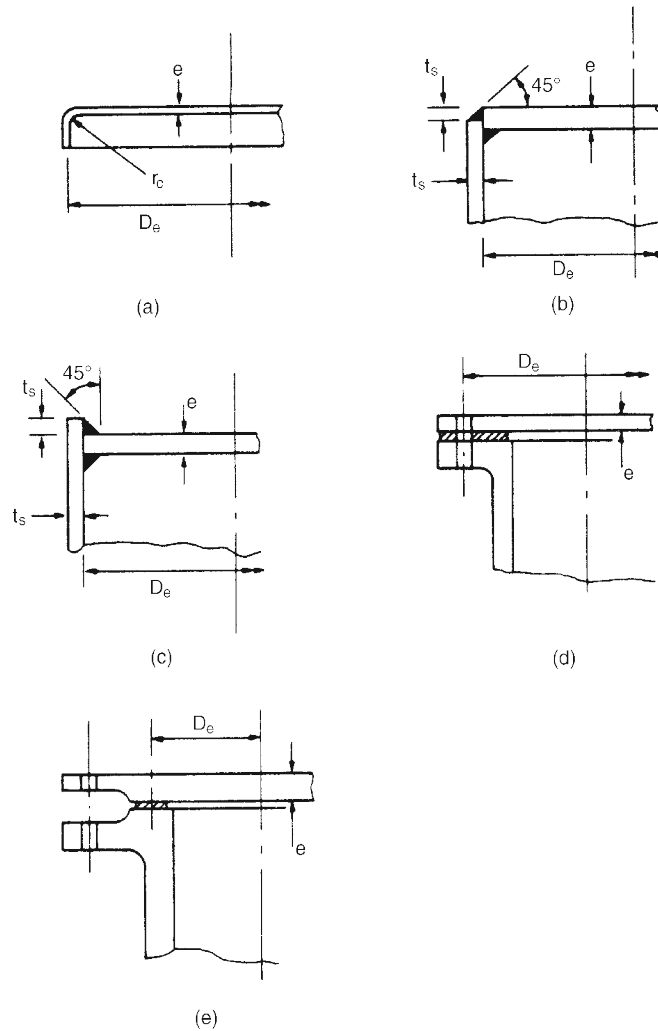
Flat-end closures (a) Flanged plate (b) Welded plate (c) Welded plate (d) Bolted cover (e) Bolted cover
